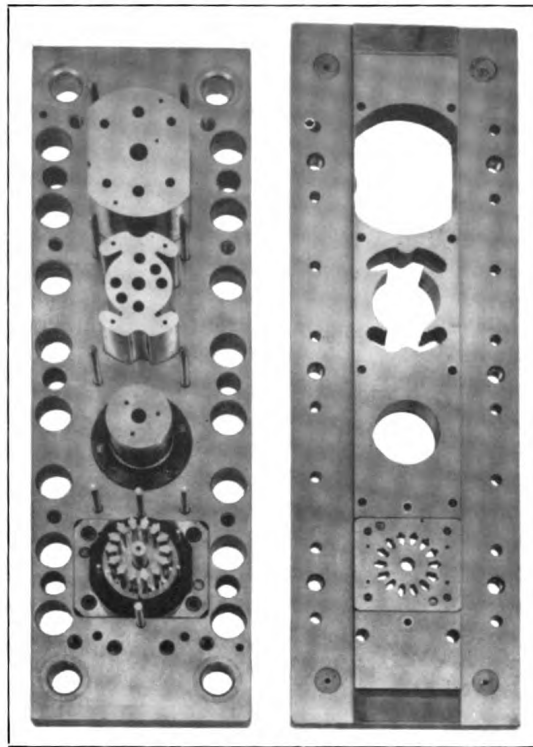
Punch plate and stripper of the stator-rotor lamination die illustrate the requirement for the locational accuracy of the Jig Borer.
